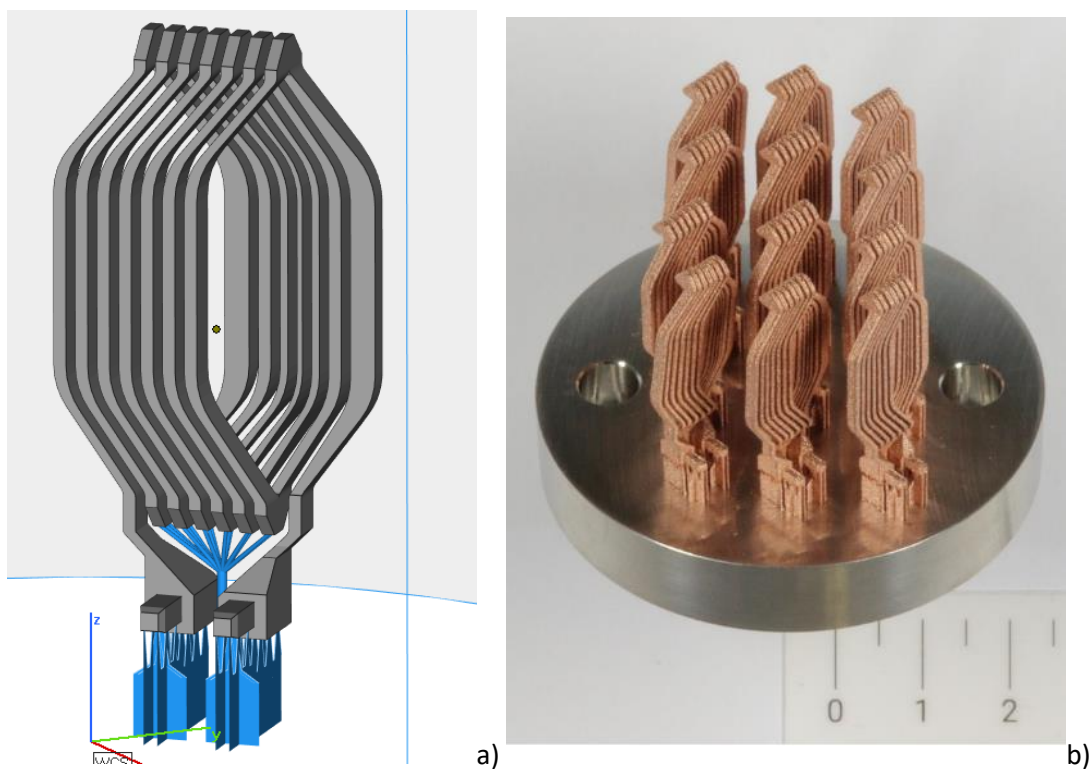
Manufacturing of demonstrator (coil for electric motor) – a) CAD design (design by Unicorn Engineering GmbH) b) manufactured CuCrZr parts on the building platform
